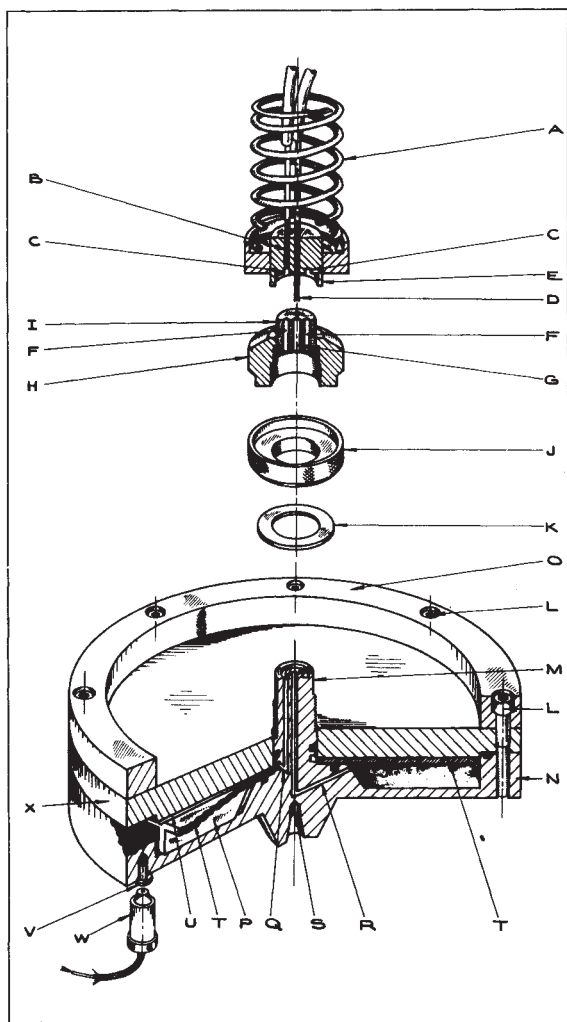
Exploded view of the rotor shown in Fig. 1 (the width of the rotor itself is 15 cm). A–E, removable seal; A, spring; B, lateral feed tube; C, slotted groove; D, central feed tube; E, bush; F, peripheral drill holes; G, central drill hole; H, bush; I, rotating Rulon seal; J, nut; K, washer; L, screws; M and N, rotor body; O, alloy ring; P, septa; Q, core outer drill holes; R, inner drill holes; S, left-hand thread; T, perspex disk; U, groove in disk; V, activator screws; W, magnetic pickup; X, perspex lid. (From ref. 1.)
